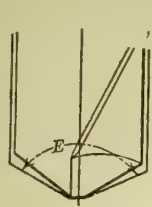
SHOWING INCLUDED ANGLE OF CUTTING EDGES OF 118°.
